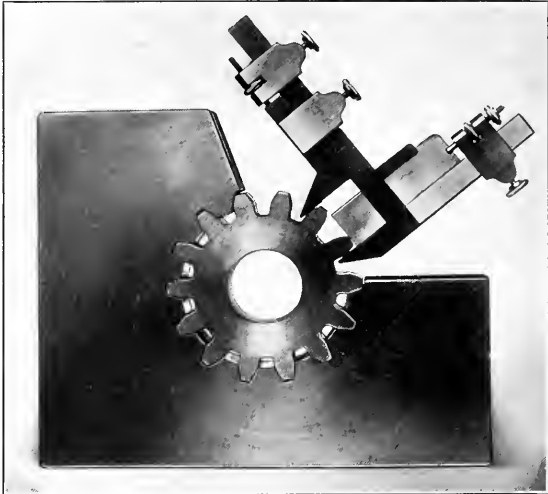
Gear Tooth Caliper used to determine when Permanent Set occurred
